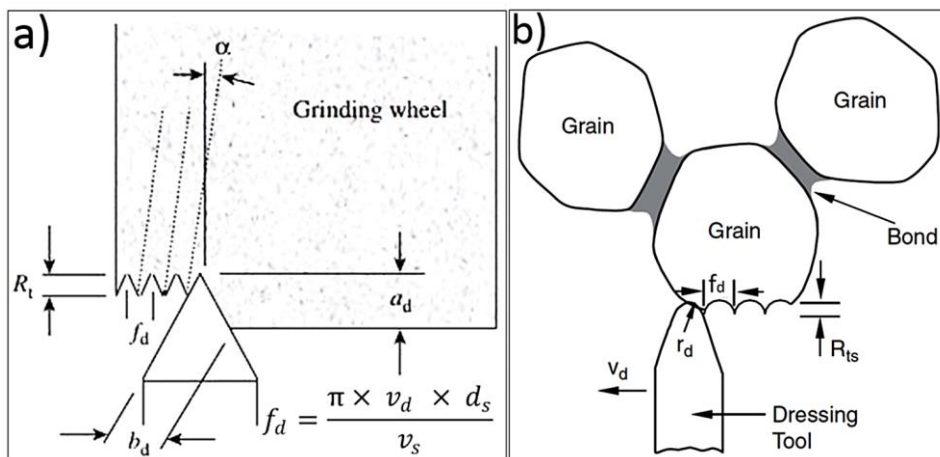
Kinematics during dressing; cutting path of a single-point diamond dressing tool through: a) the grinding wheel, b) an abrasive grain [1]
